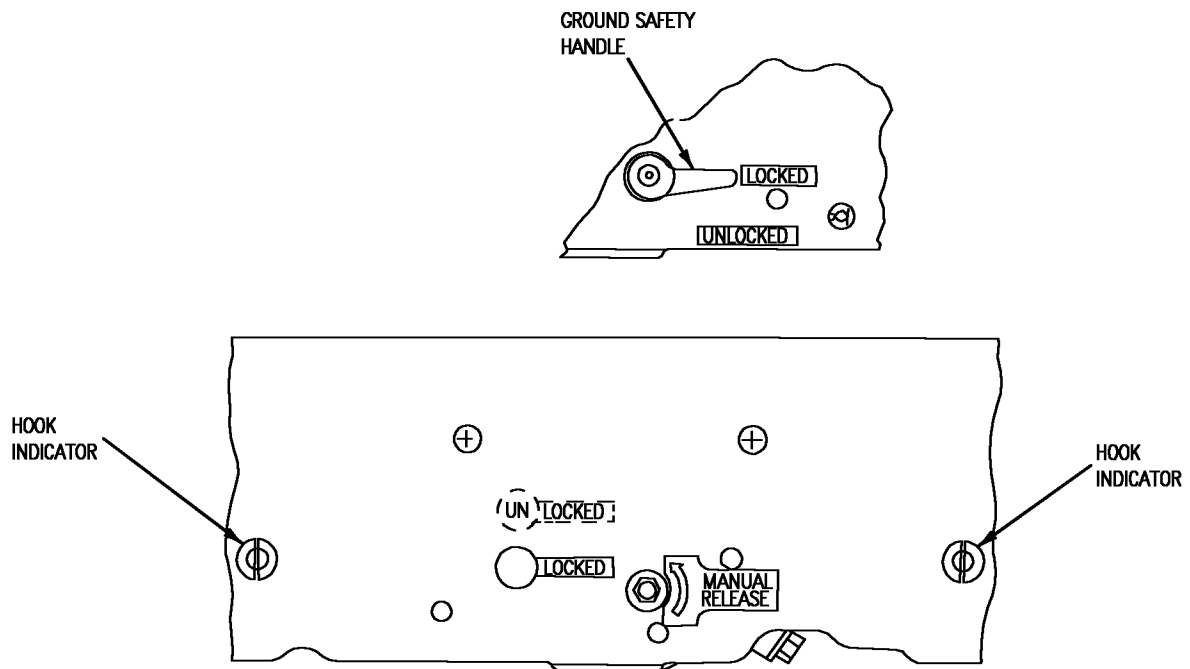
BRU-32 and BRU-33 Bomb Rack Locked Inspection
